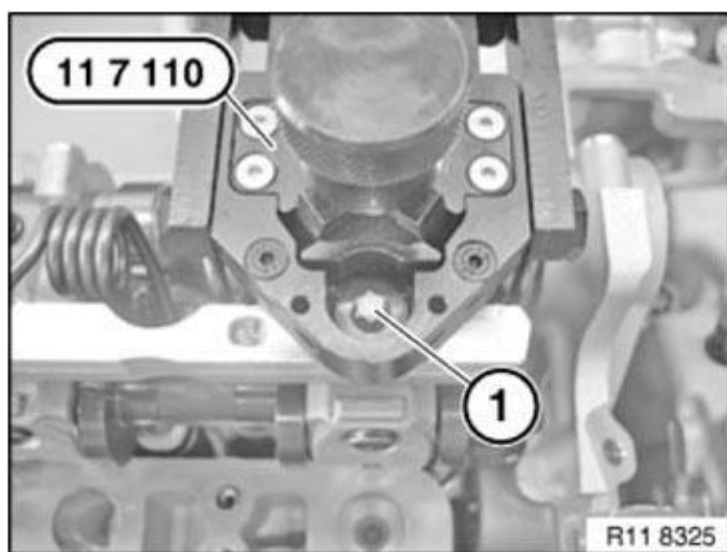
Positioning Special Tool (11 7 110) On Return Spring
